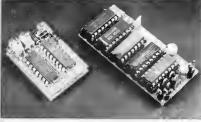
At the left the pratotype locomotive decoder and two-rail adaptor sandwiched together. At the right a locomotive board constructed with conventional components, which is evidence of the space swing afforded by surface-mount techniques.
